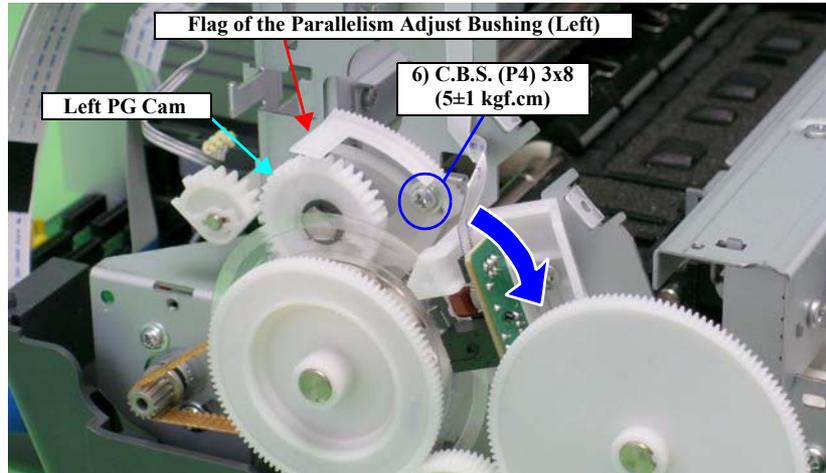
Rotating the Left Parallelism Adjust Bushing
